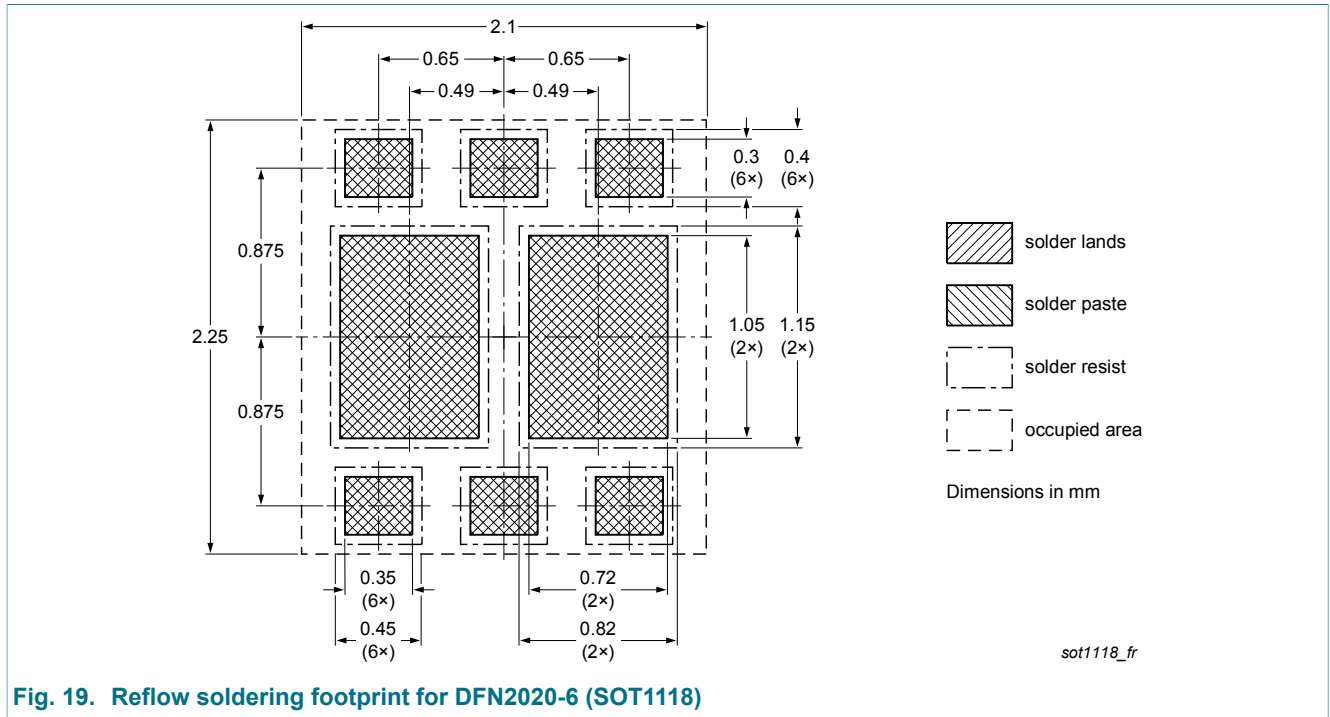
Reflow soldering footprint for DFN2020-6 (SOT1118)
